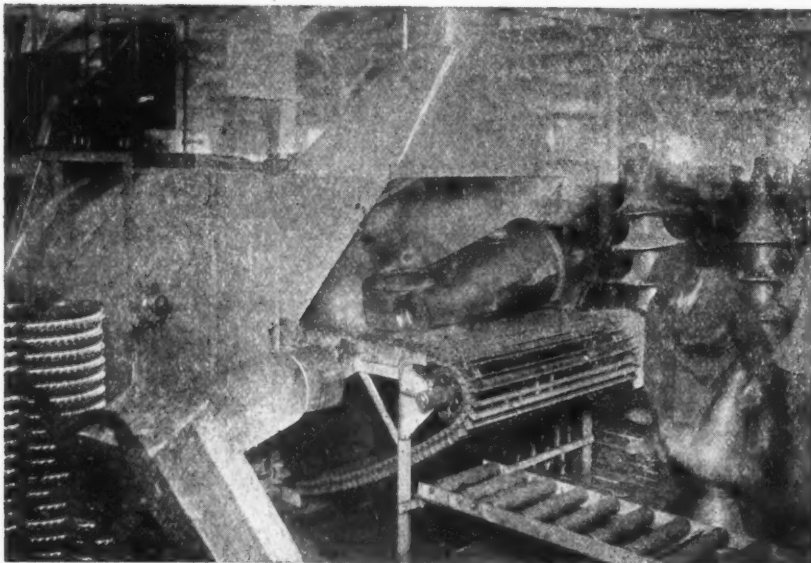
Beginning the assembly of the transmission and rear axle. The roller conveyor comes from the manufacturing department, and the first operation is that of washing
